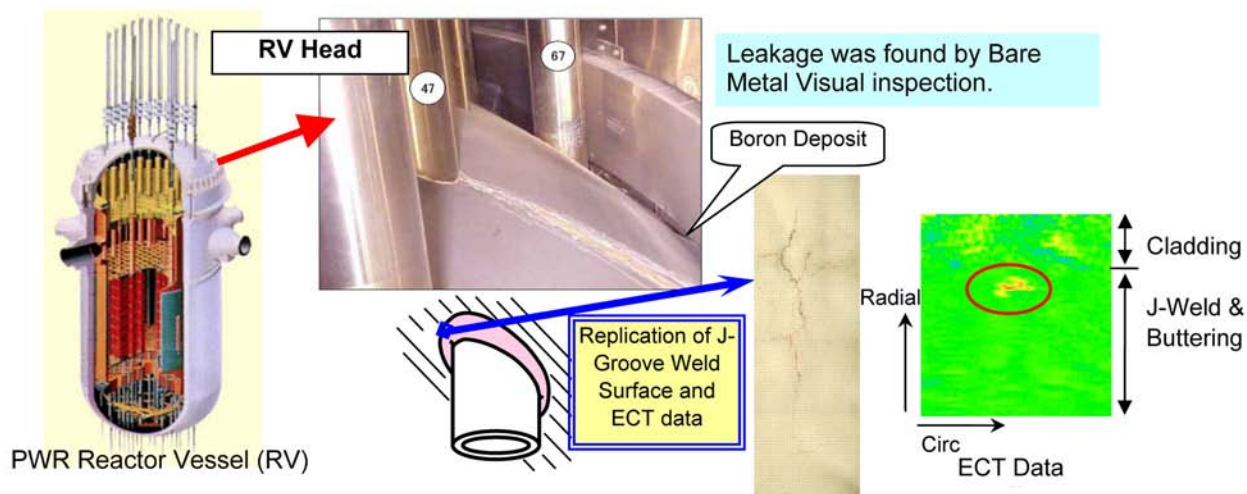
Failure of CRDM J-Groove Weld in Ohi 3
